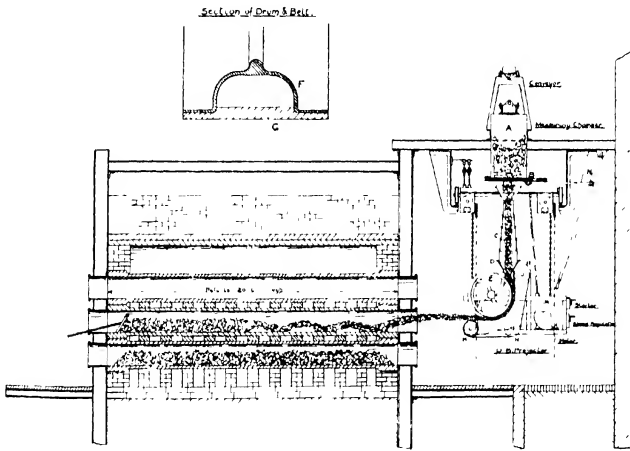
DE BROUWER PROJECTOR CHARGING MACHINE, MADE BY W. J. JINKINS & CO., LTD.
